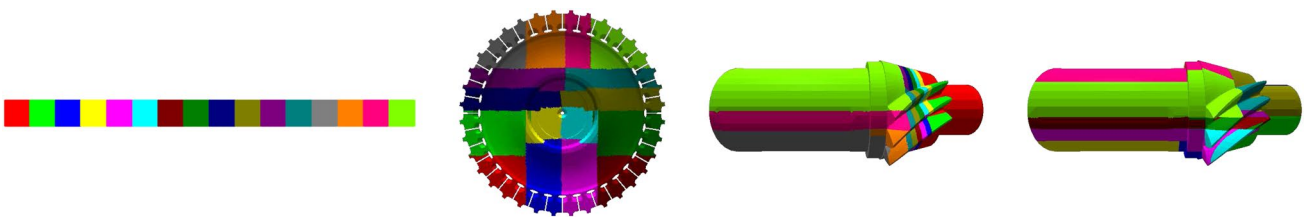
Test models: beam, rotor, cracked gear, and gear
